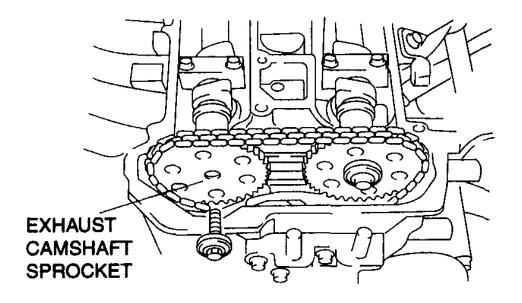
Camshaft Sprocket Washer Courtesy of MAZDA MOTORS CORP.
